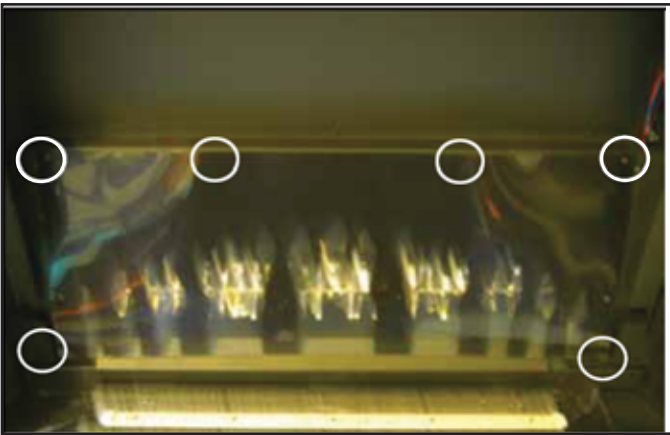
Location of six Screw Fasteners that attach Flame Screen to Chassis
